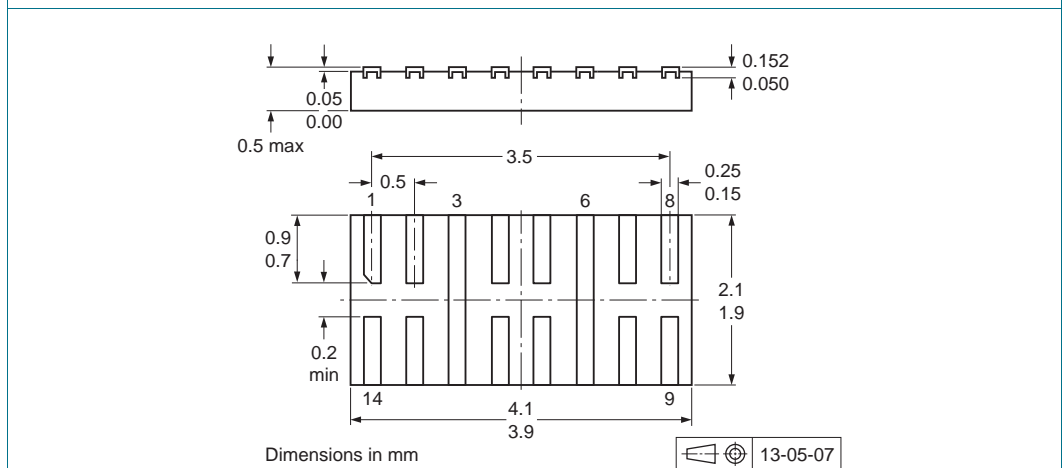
Package outline DFN4020-14 (SOT1334-1)
